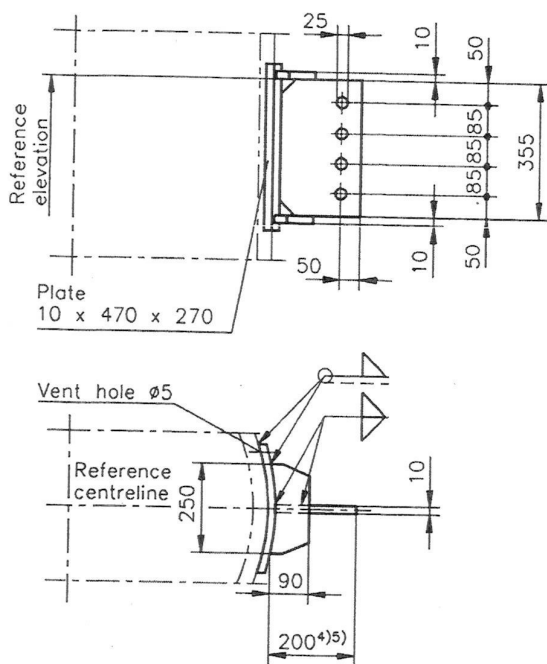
Clip, type 3D, welded to vessels without Insulation or with heat insulation
